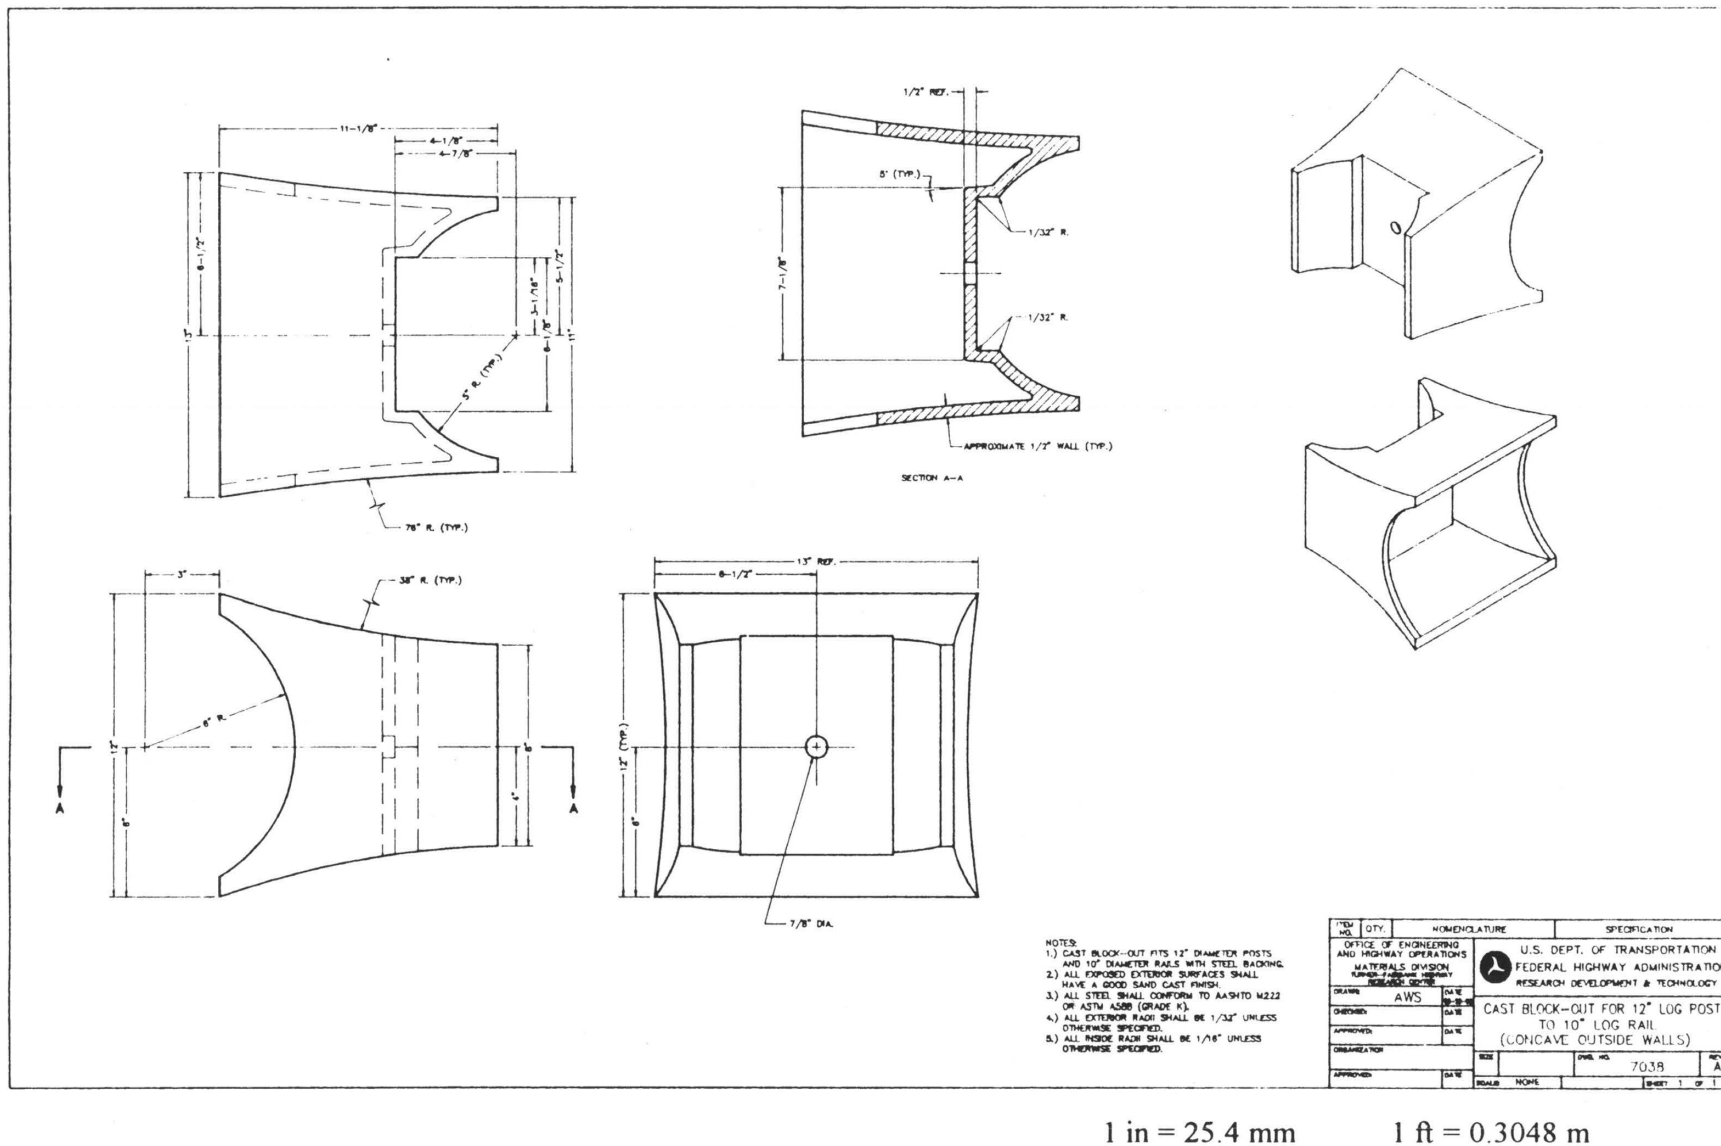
Details of the Cast Steel Blockout Used in the Steel-Backed Log Rail System.
